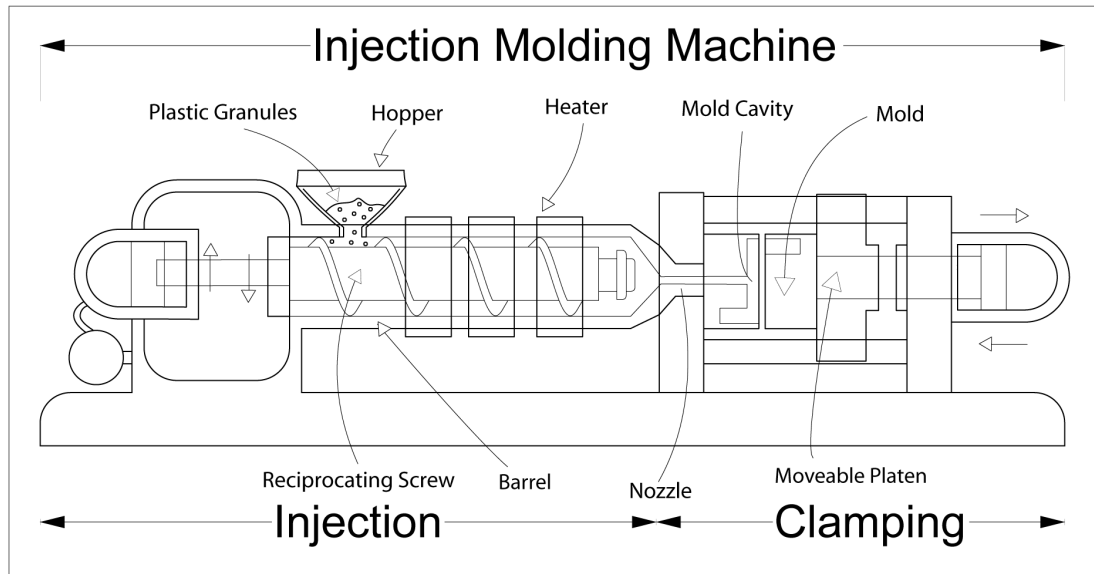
An injection moulding machine (Created by Brendan Rockey, University of Alberta Industrial Design, for a Wikipedia article about injection moulding)
